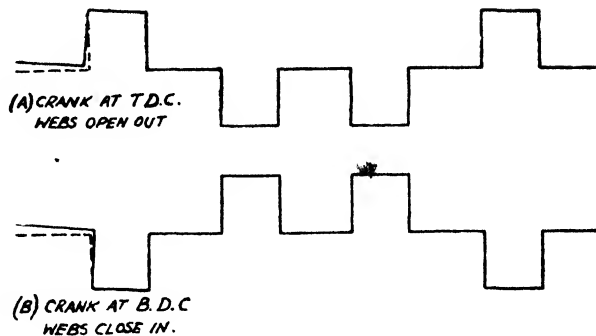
CRANKSHAFT WITH EXAGGERATED ALIGNMENT FAULT
